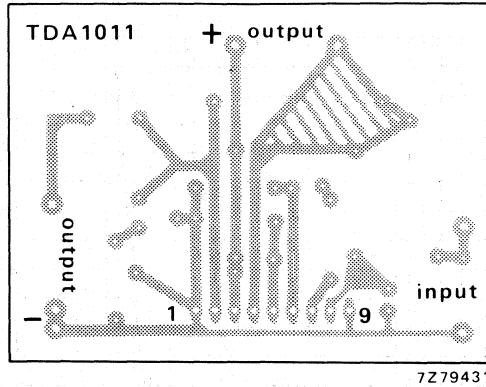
Track side of printed-circuit board used for the circuit of Fig. 4; p.c. board dimensions 62 mm x 48 mm.
